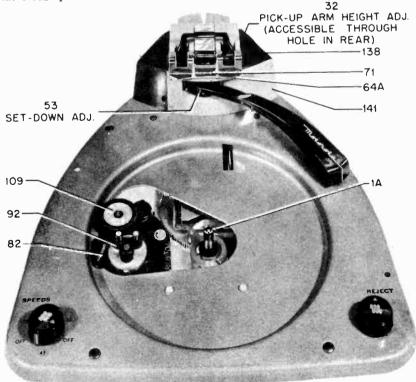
TOP VIEW OF RECORD CHANGER WITH TURNTABLE REMOVED
